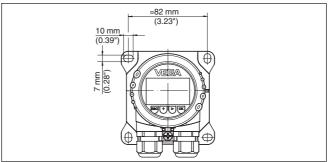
Drilling dimensions for VEGADIS 82 for wall mounting
